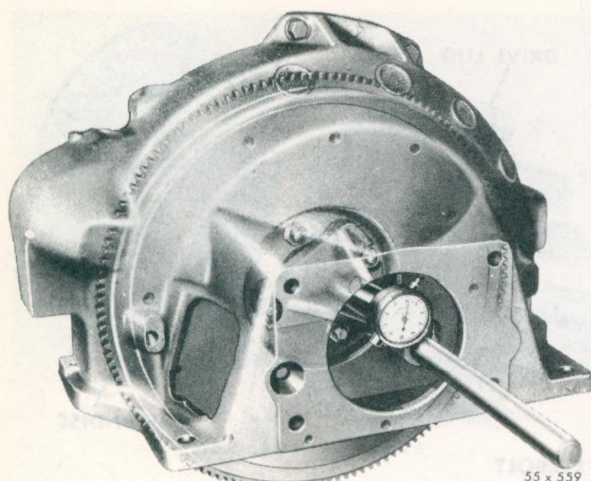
Fixture C-869 Installed to Check Clutch Housing Bore
